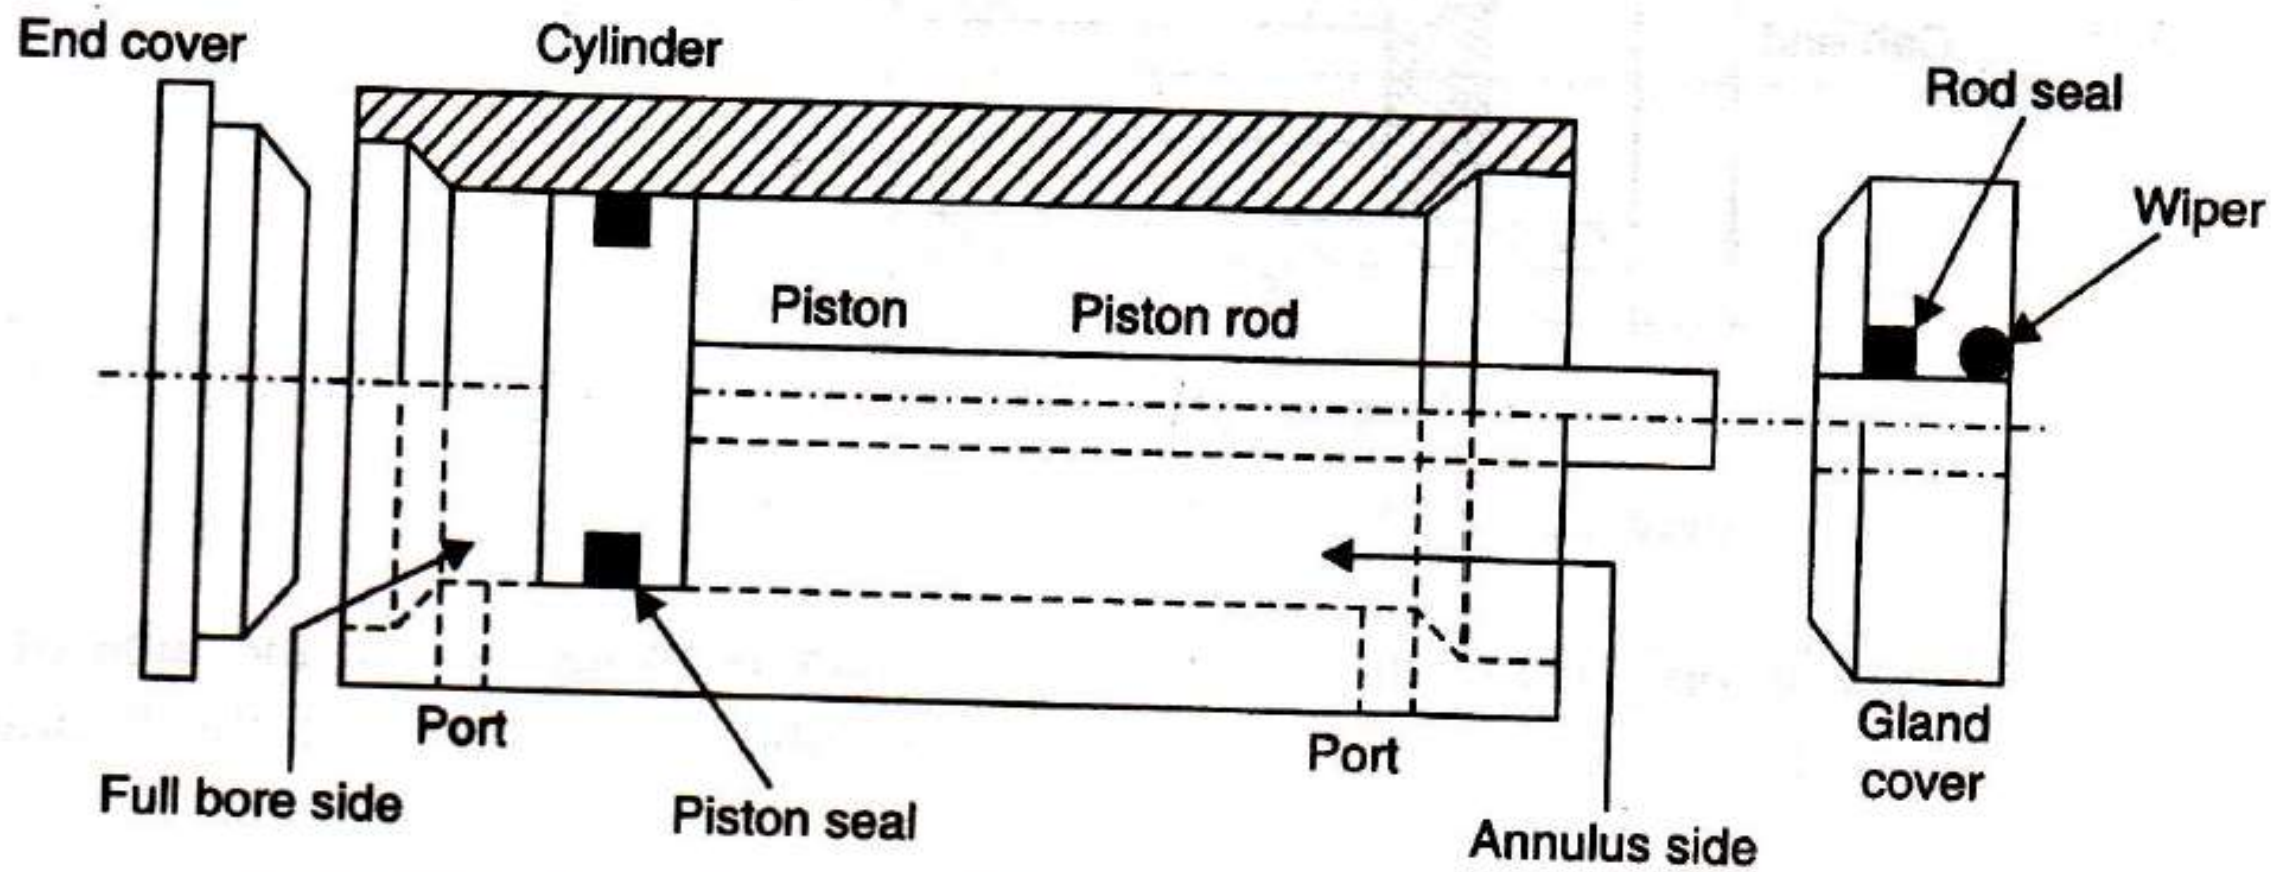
General constructional arrangement/parts of a hydraulic cylinder.
